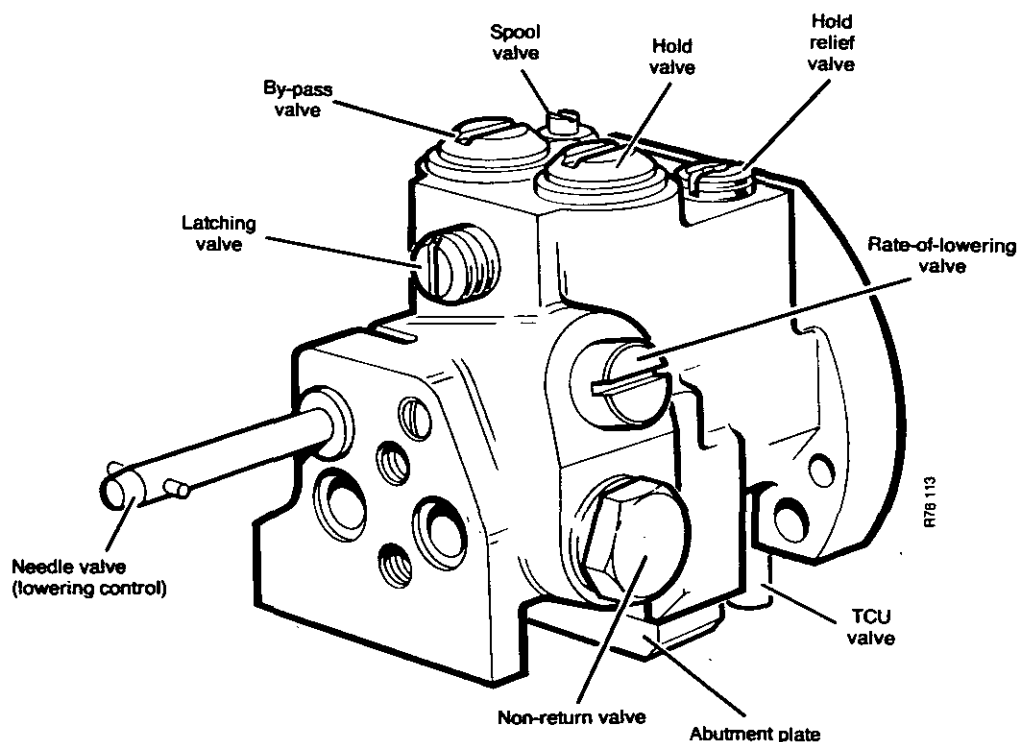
SELECTAMATIC CONTROL VALVE ASSEMBLY
